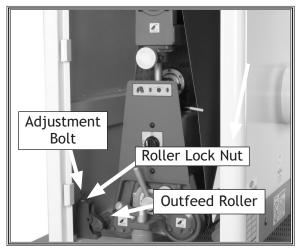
Outfeed pressure roller adjustment locations (W1756).
